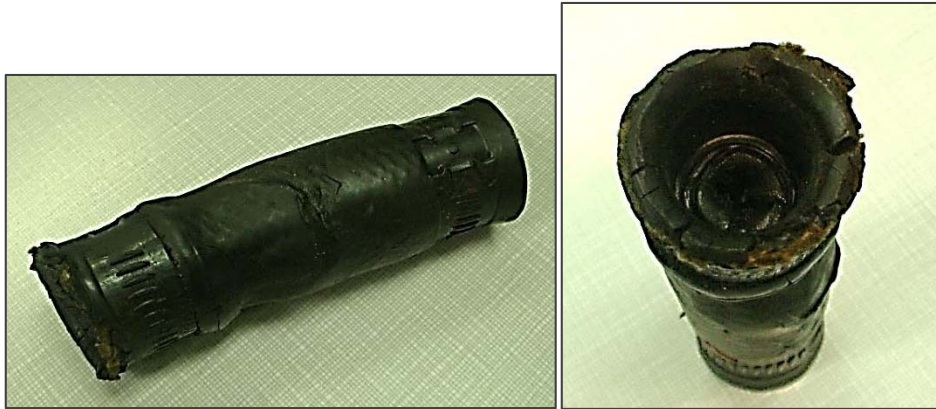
Example of deformed hose adapter, P/N 4120032-11
